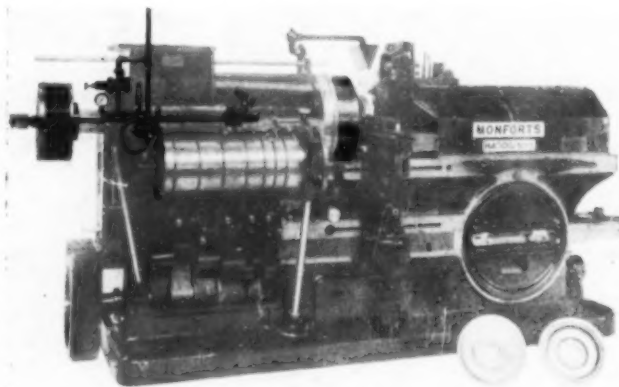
Monforts Automatic Chucking Machine, in which the chuck is air-actuated, and in which the gripping pressure is automatically reduced after the roughing cuts so as to free the work-piece from undue distortion for the finishing cuts. (A. C. Wickman, Ltd.)
